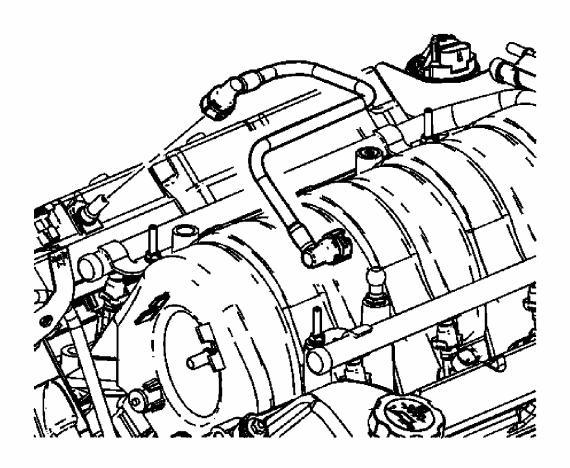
Identifying PCV Dirty Air Tube Courtesy of GENERAL MOTORS CORP.
